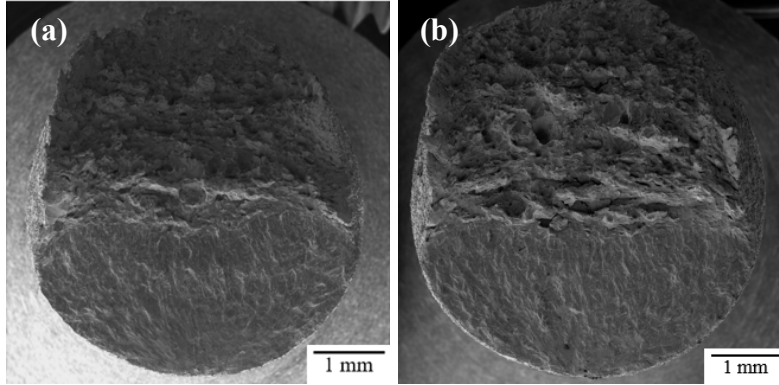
Representative ultrasonic fatigue fracture surface fractography for 5.0 mm CL M2 samples (a) as-built and (b) stress-relief heat treated.
